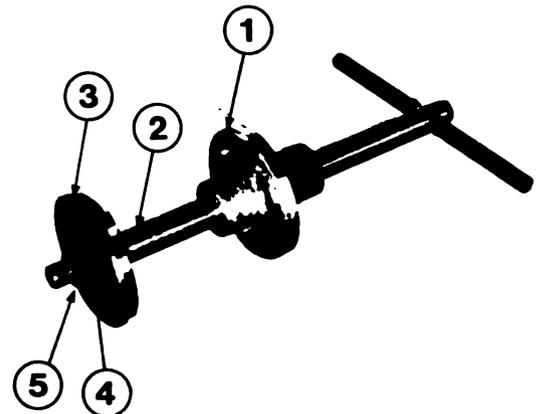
(V10196). The Part No. ST-1318 Chamfer Tool.
